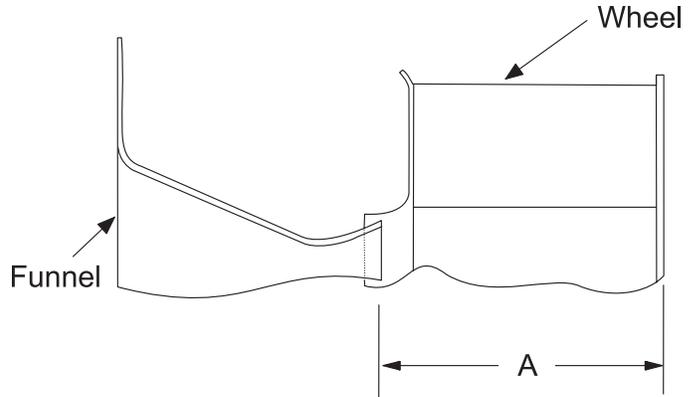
DWDI Airfoil Wheel-to-Funnel Alignment
